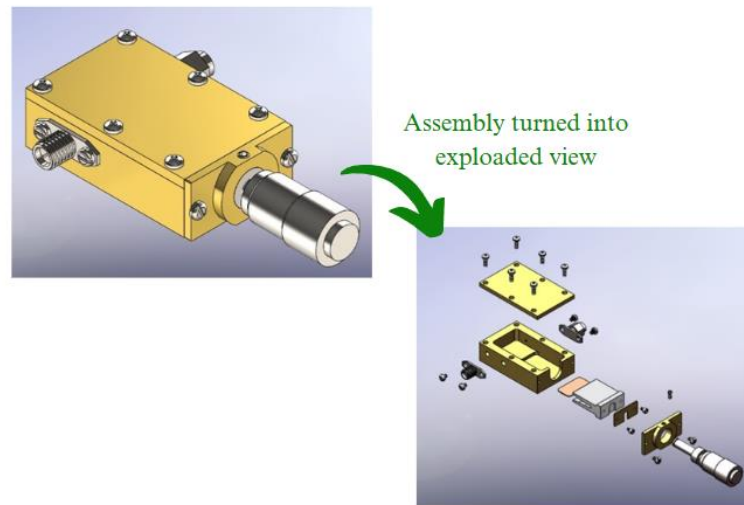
The assembly as well as the exploded view of the regarded phase shifter
